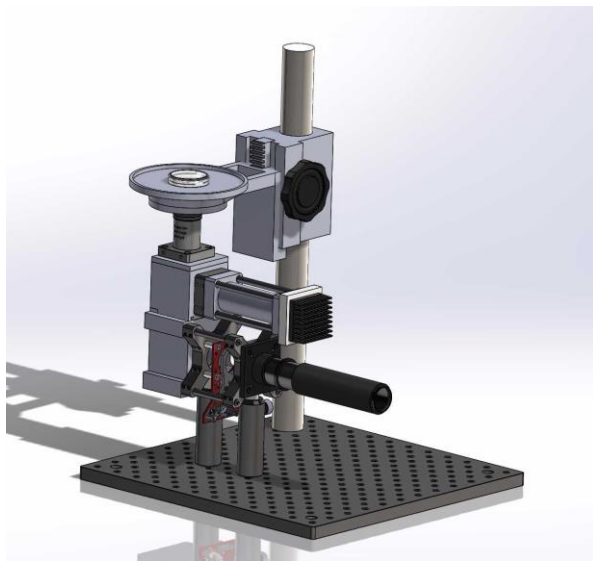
Final SOLIDWORKS assembly of FRET microscope. The final assembly has three 3D printed parts: dichroic and fold mirror cubes, mirror holders and tube for light source. The additional parts assembled were purchased from various optic suppliers. The microscope contains an adjustable z-axis that will enable the user to attain a clear image of the cells. The top filter cube holds the dichroic mirror whereas the bottom filter cube holds the fold mirror. The microscope will be secured on an optical board.
